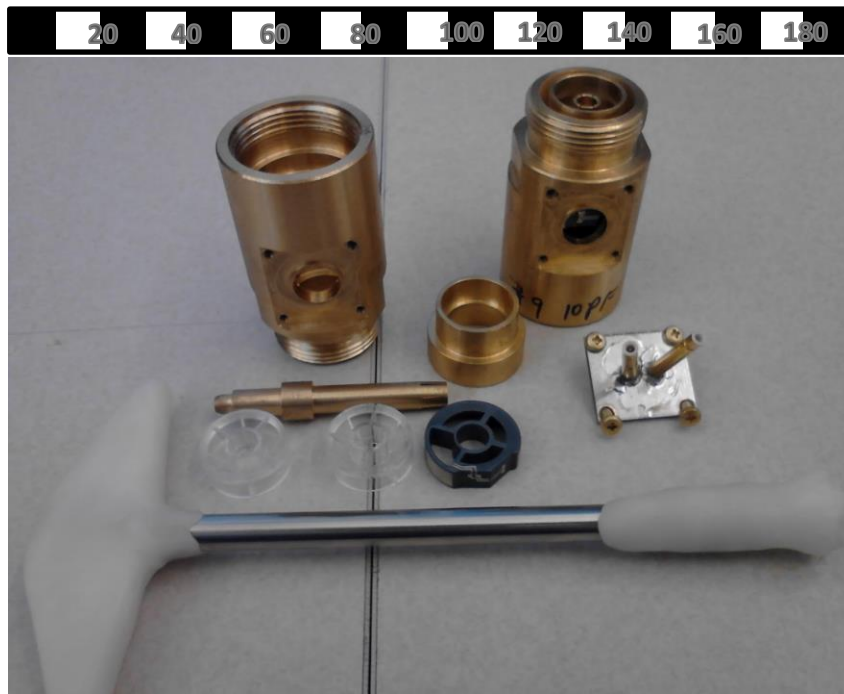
An unassembled test fixture and an assembled test fixture with a TXC platform and TXC structure test ports.
